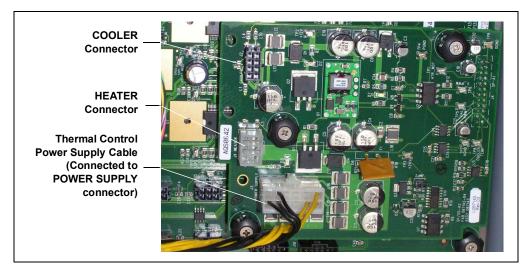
Main SP Electronics Board: Thermal Control Power Supply Cable Installed
